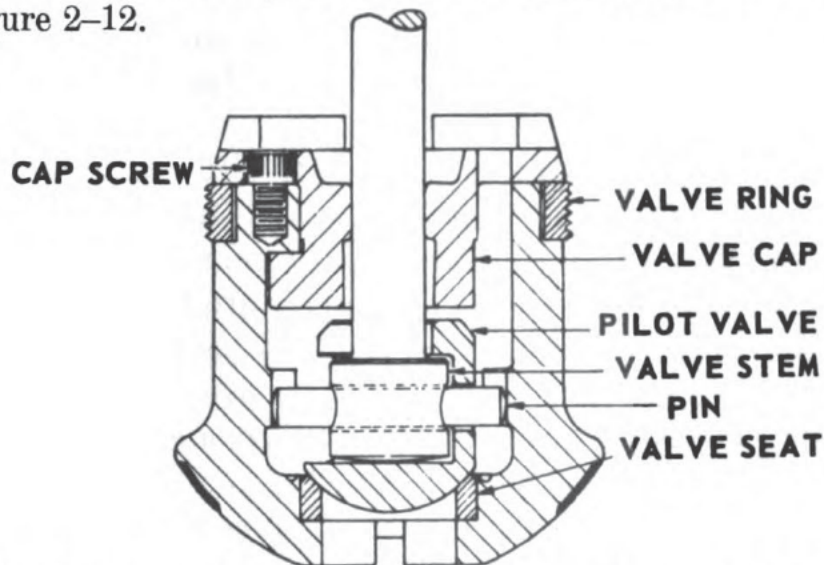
Enlarged section of a turbine nozzle control valve.
